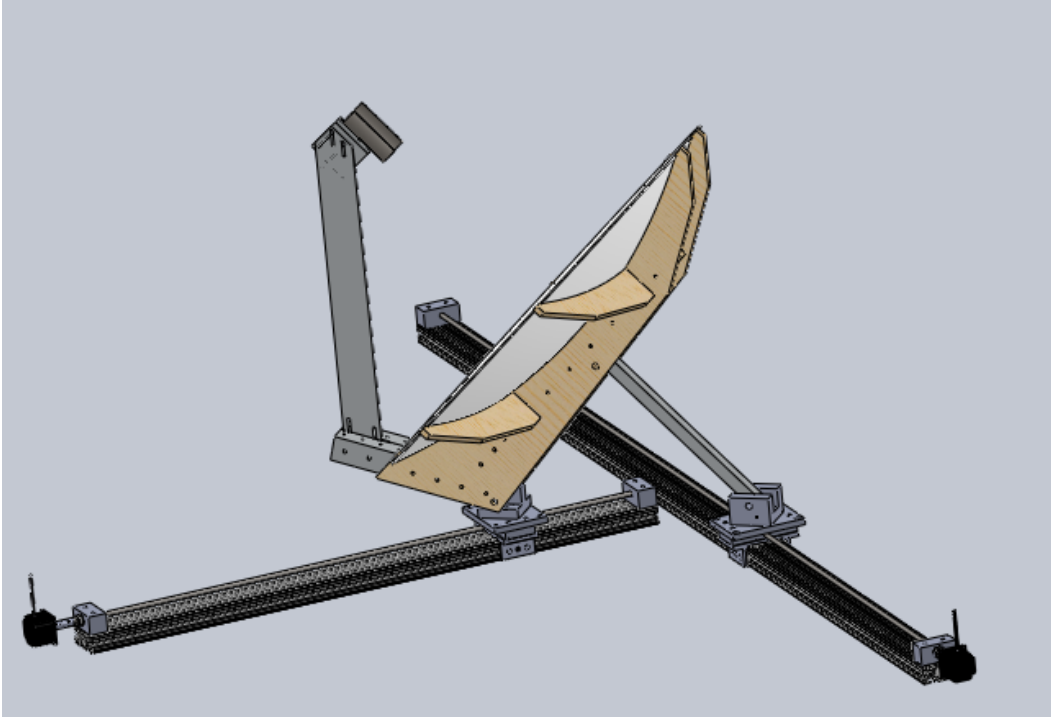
CAD model of tracker showing the entire assembly (mirror support, clevis mounts, and actuator assemblies)
